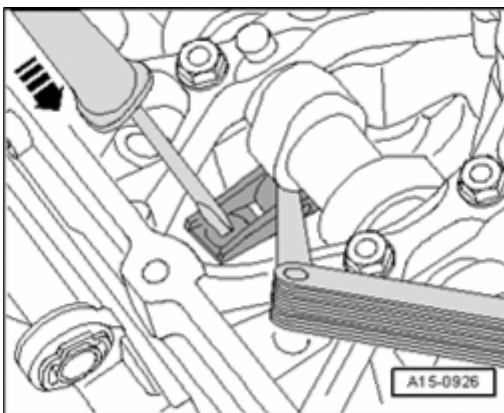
Checking Play Between Cam Lobes And Roller Rocker Lever
